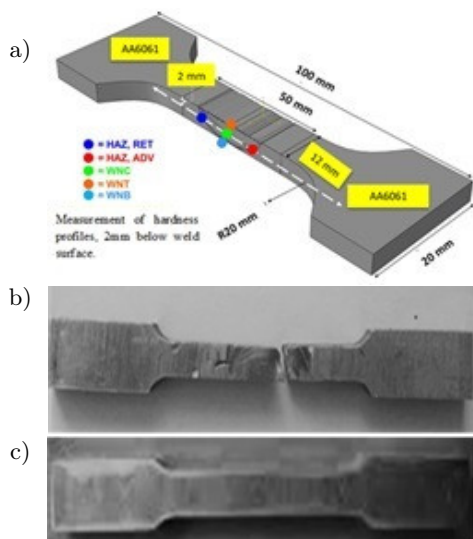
Scheme of the specimens: a) Configuration and dimension of the tensile specimens and the hardness measurement; b) Weld samples after tension; c) Weld samples before tension
